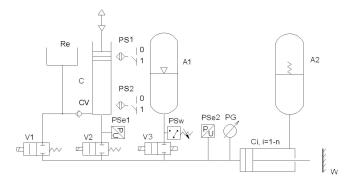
The multiple strokes hydraulic pump with one cylinder for double-acting clamps, variant 5.
